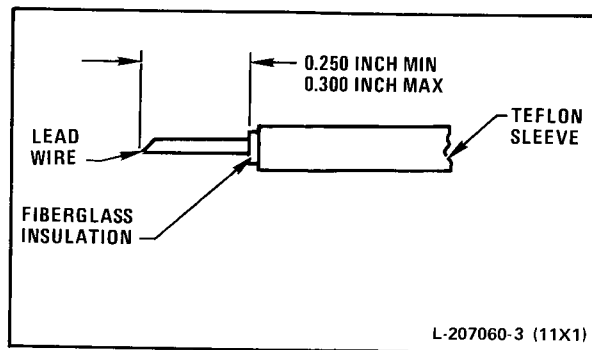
Installation of Lead Wires Into Insulator Assembly (Sheet 1 of 6)
